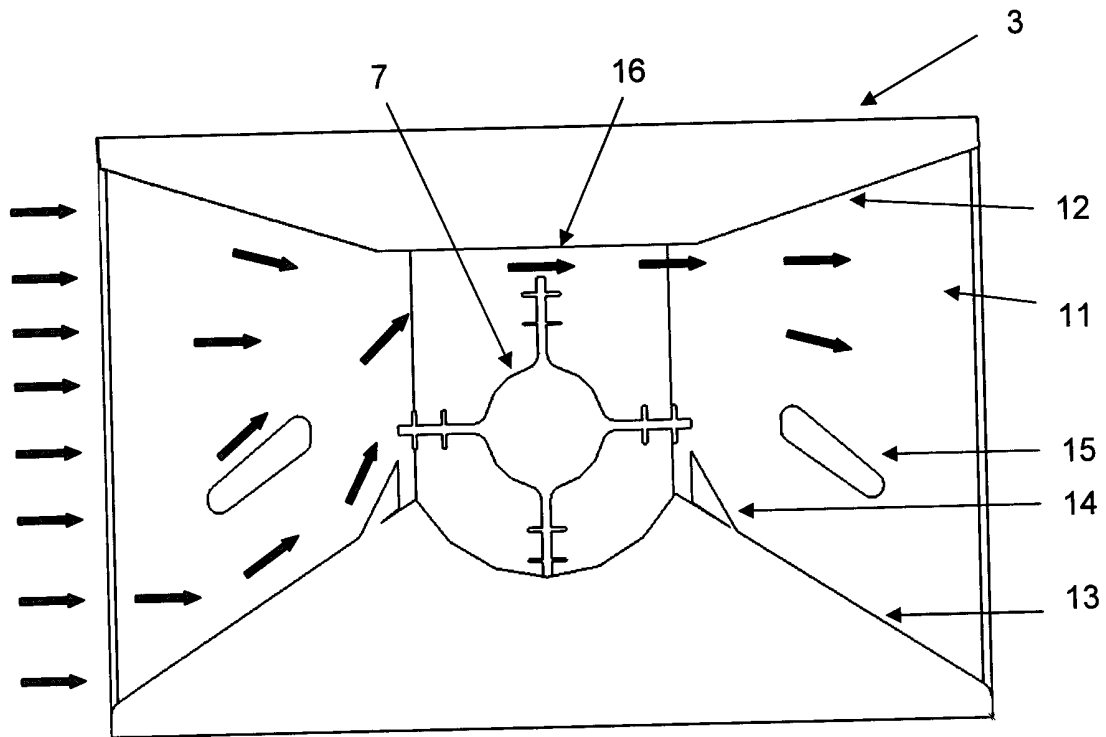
Side Elevation of Turbine Assembly showing current stream flow path
